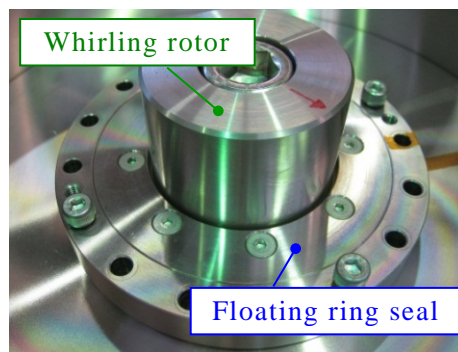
Floating ring seal -inlet side view of the preassembly whirling rotor and FRS
